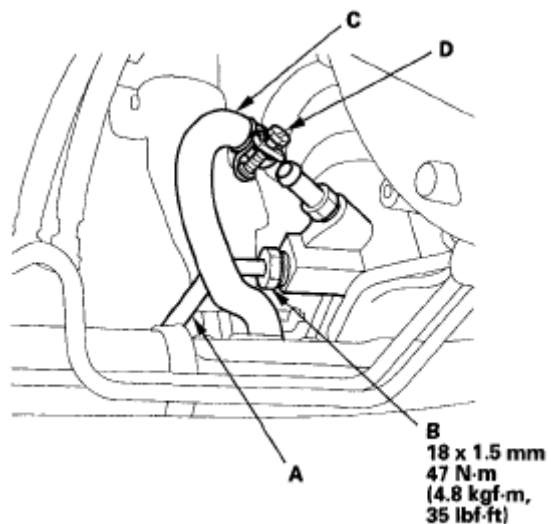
Identifying Flare Nut (With Torque Specifications)
